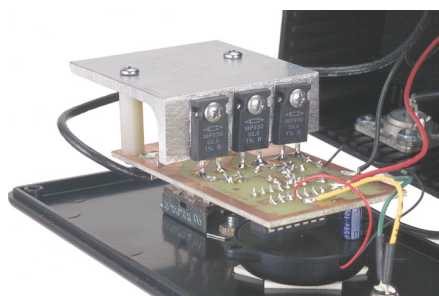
Close-up view of three CaddockTO-220 style bridge resistors mounted on the heat sink.
